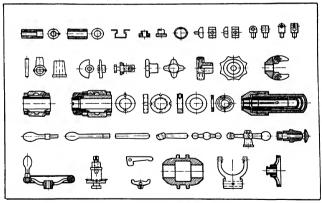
INTERNAL STANDARDS OF A MACHINE-TOOL WORKS
